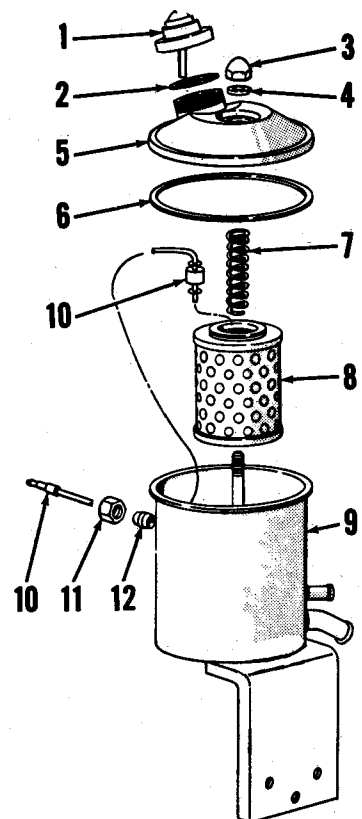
Exploded view of power steering system reservoir used on 8000 and 9000 models and early 8600 and 9600 models. Oil level switch (10) is connected to warning light on instrument panel. Filter element (8) and oil in reservoir should be renewed after each 600 hours of use.
